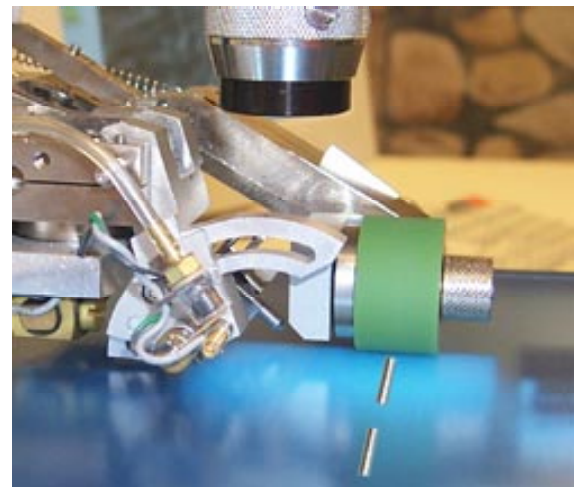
Another view of roller wheel breaking the dice of a row of bars.
